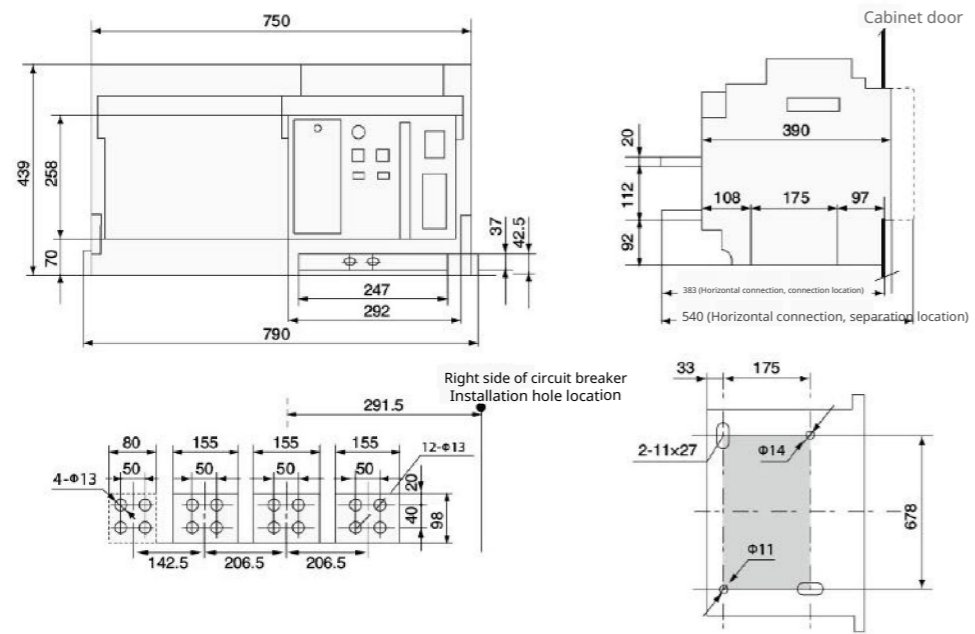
Drawer-type SDW1-4000 Circuit Breaker (Inm = 4000A, four-pole) Dimension Diagram
